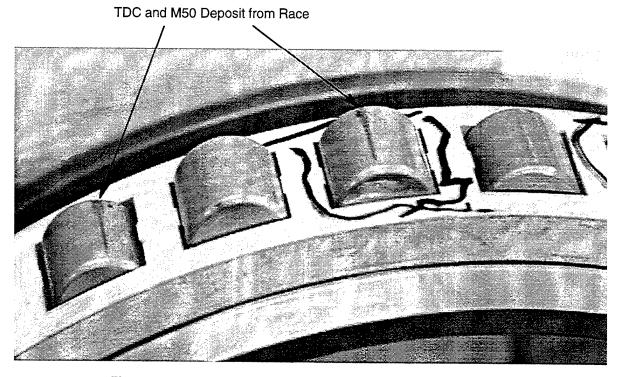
Photo of Assembly Damage to Roller TDC Coating.
